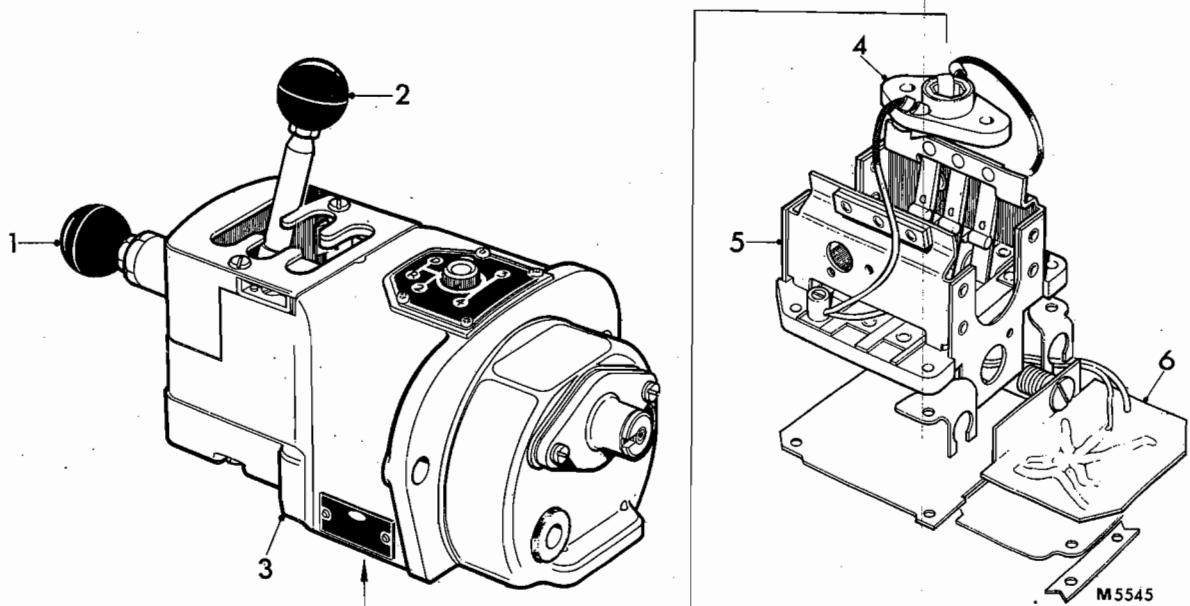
EXPLODED VIEW OF SELECTOR SWITCH
